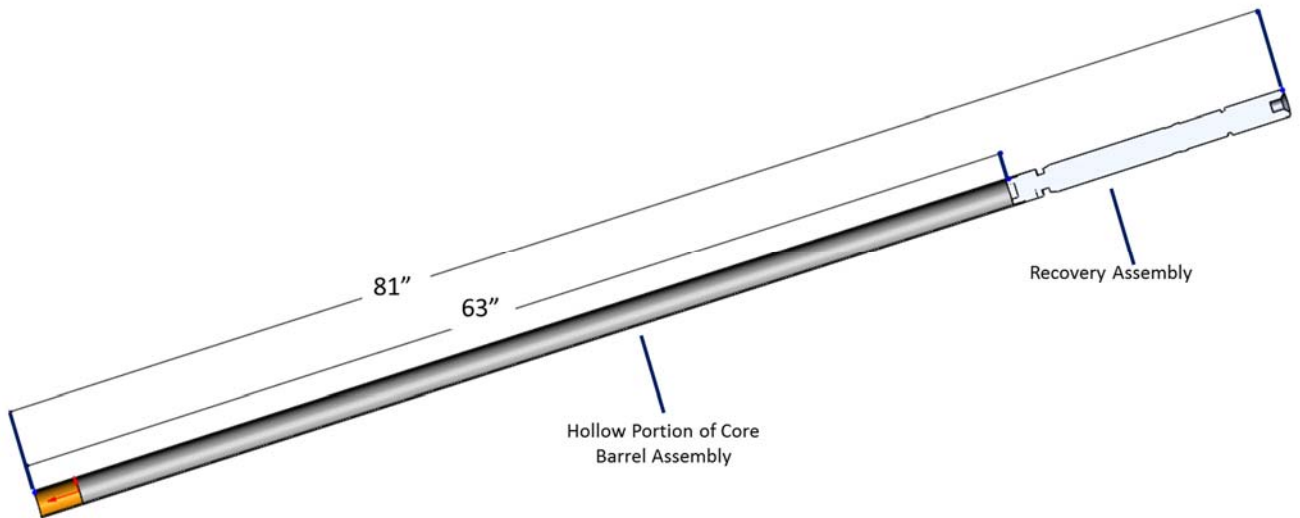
Cross-section of Sandvik TK56 Inner Core Barrel Assembly.
